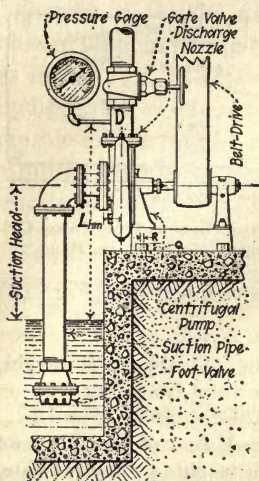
Pump Showing 40 Lb. Per Sq. In. Gage Pressure At Discharge Nozzle.
